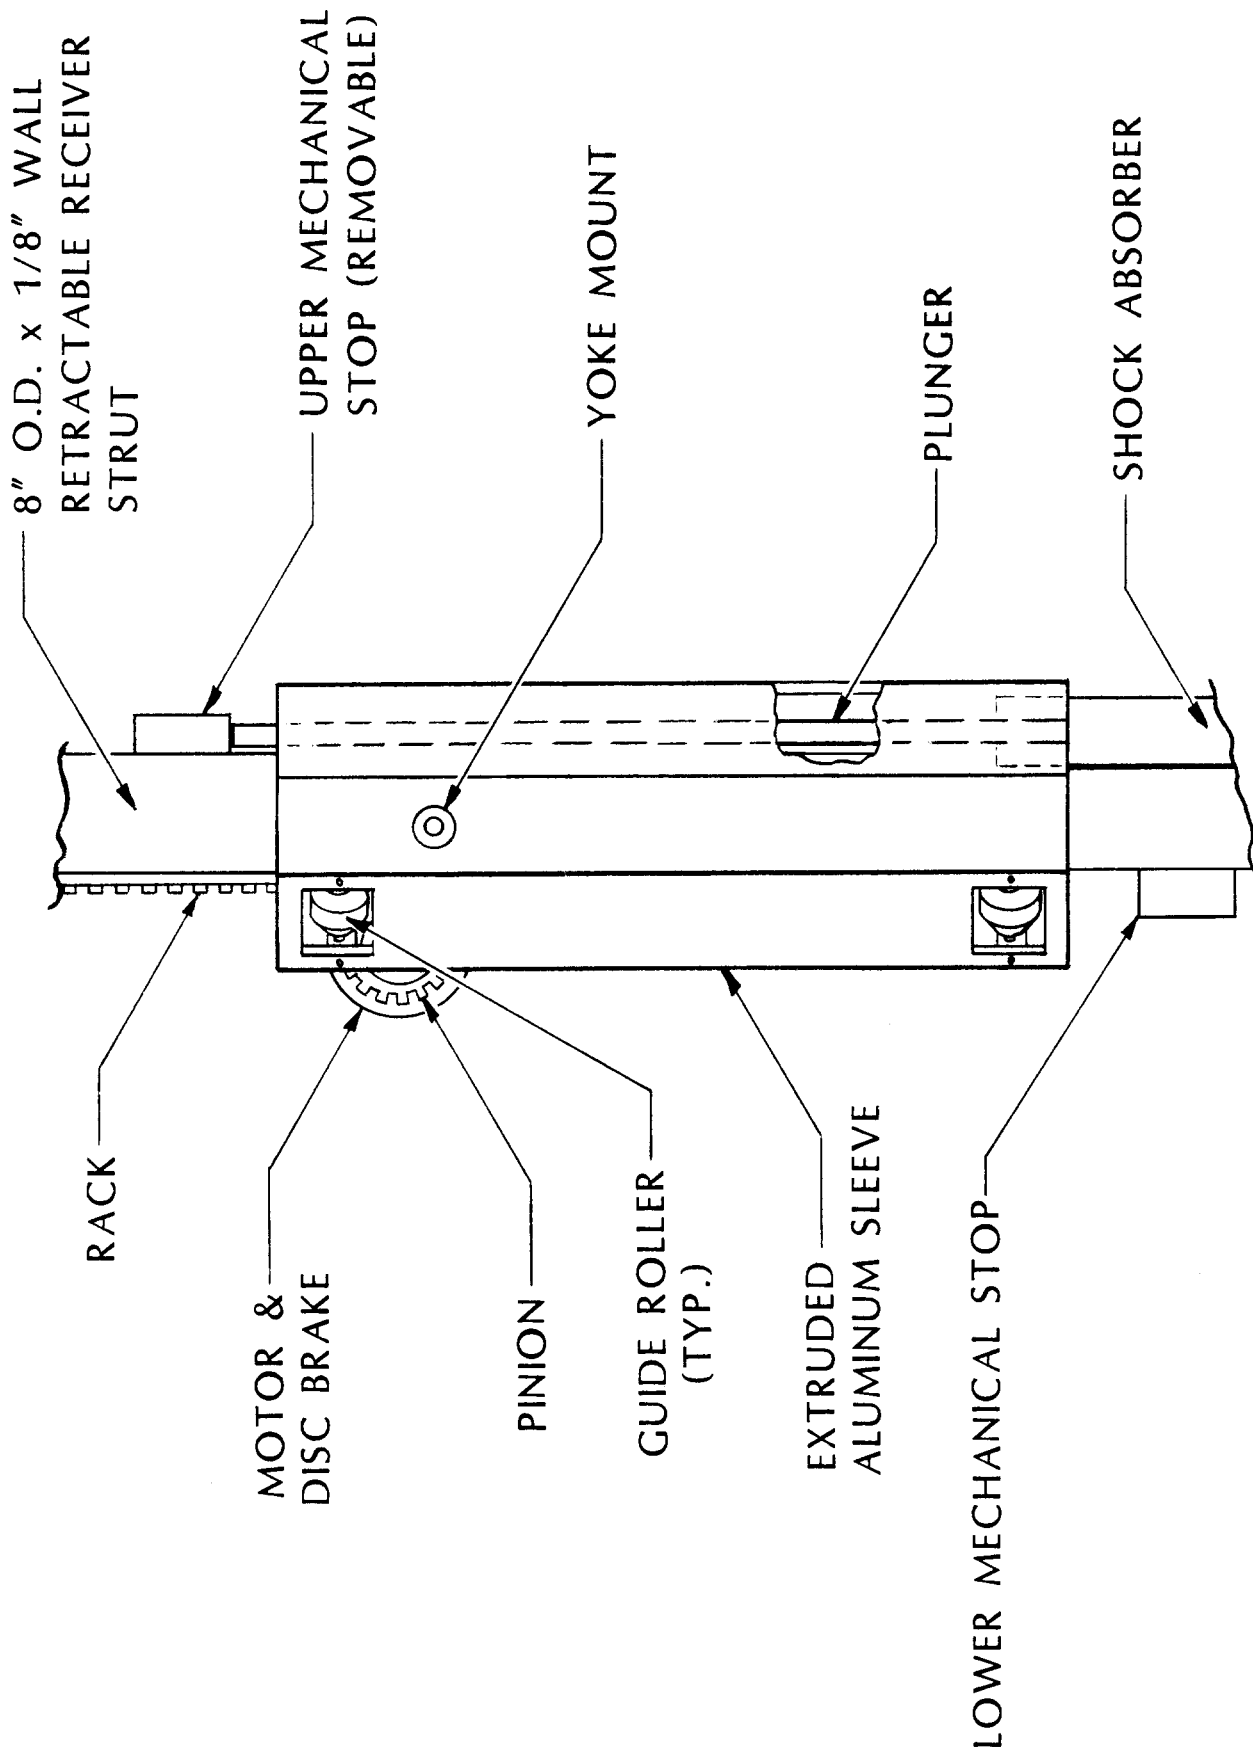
RETRACTABLE STRUT SLEEVE SIDE VIEW
